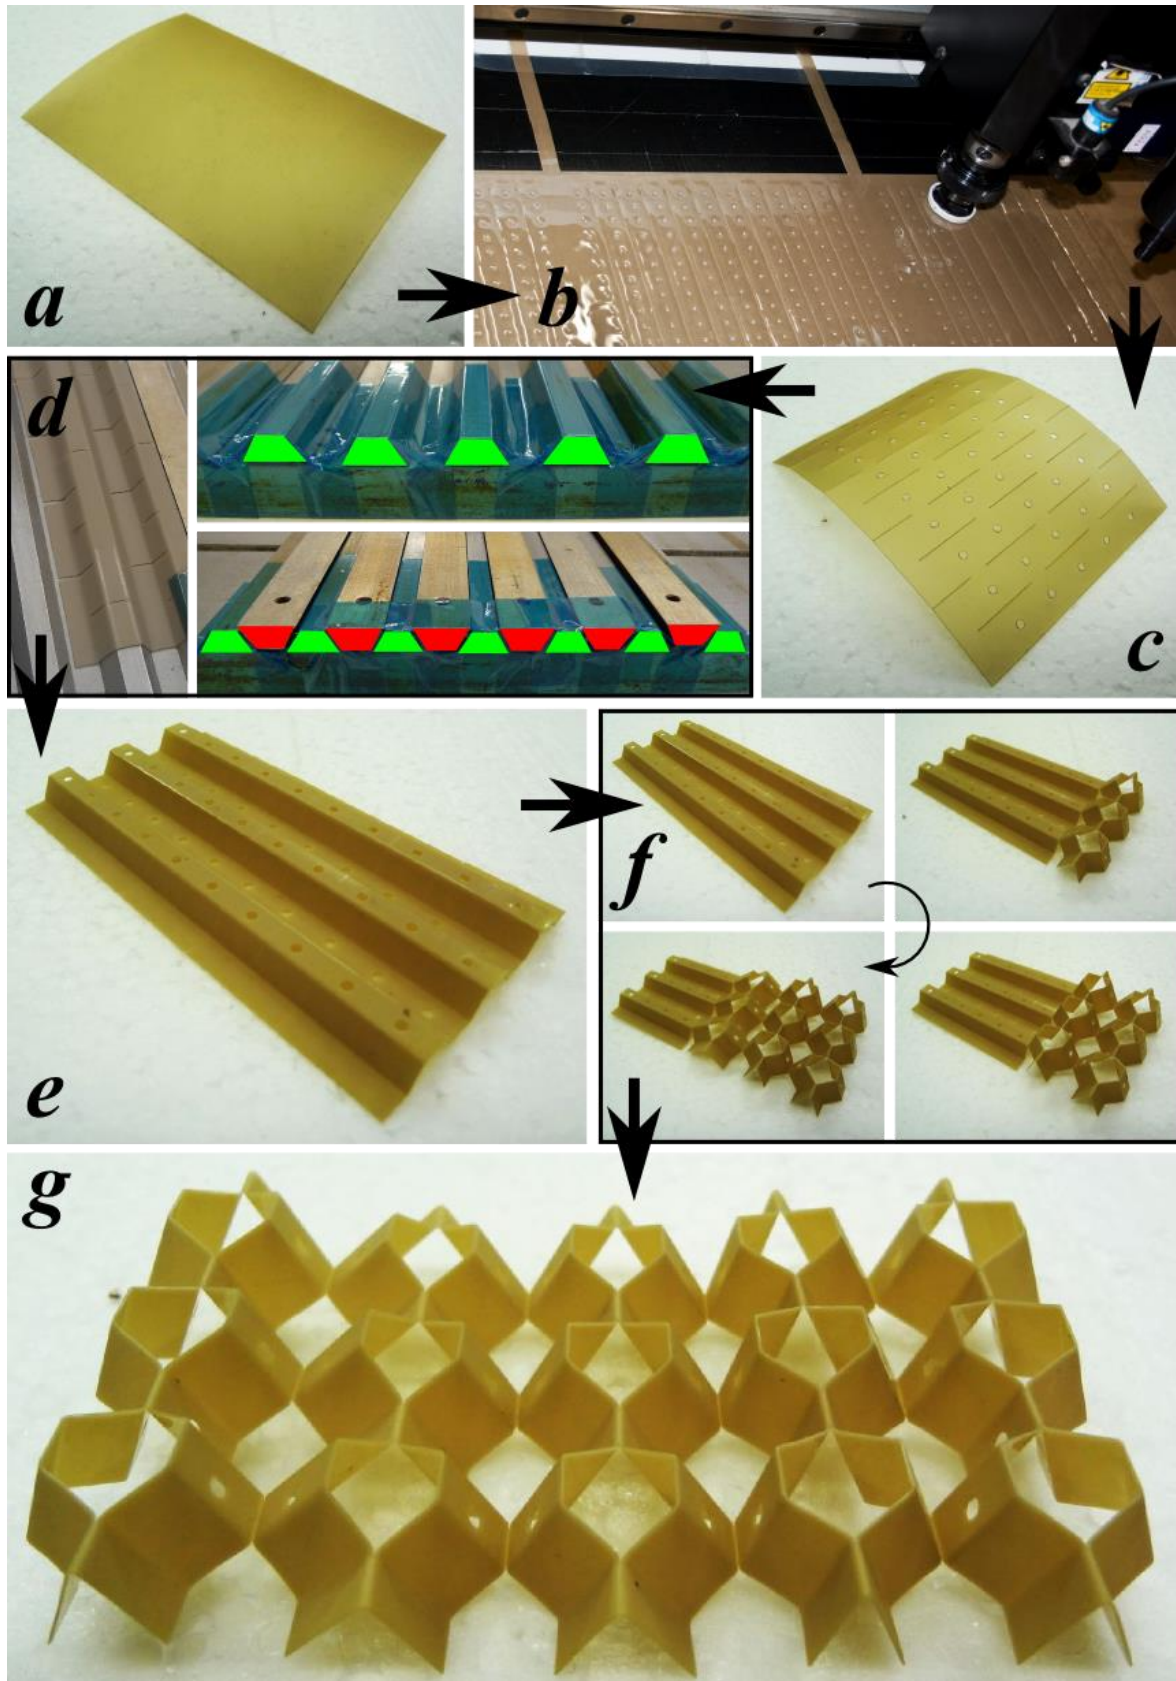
The Kirigami manufacturing process. a) Flat sheet. b) Cutting patterns made using a ply cutter. c) Cut sheet. d) Thermoforming between hexagonal mould rods. e) Corrugated sheet. f) Folding along the corrugations. g) Open honeycomb.
